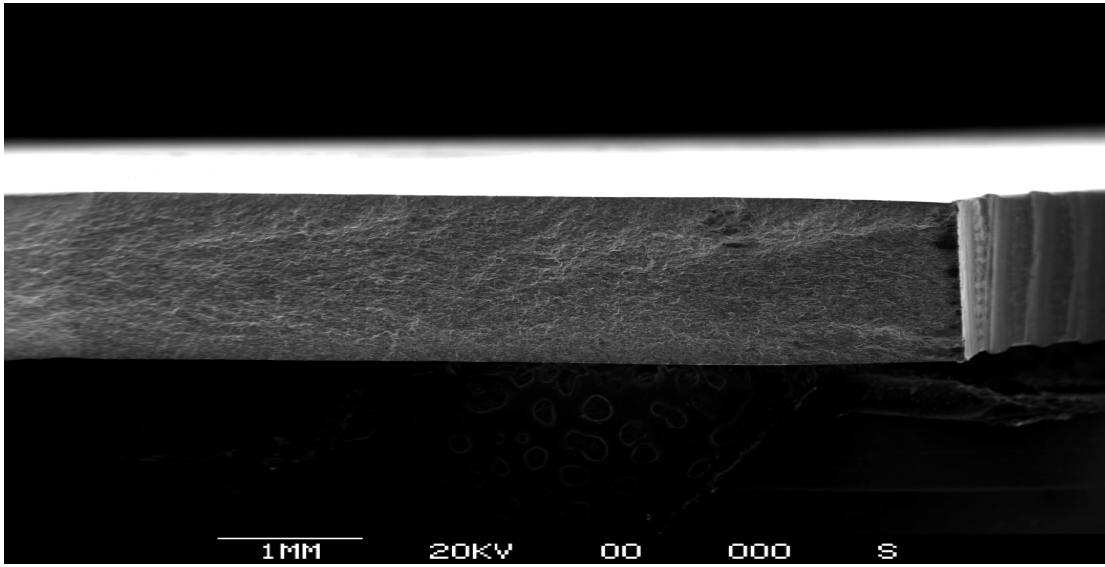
Fracture surface of specimen 2 showing entire fatigue area
